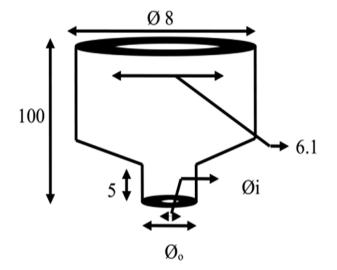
Design of tool developed for PMND-EDM; all dimensions in mm.
